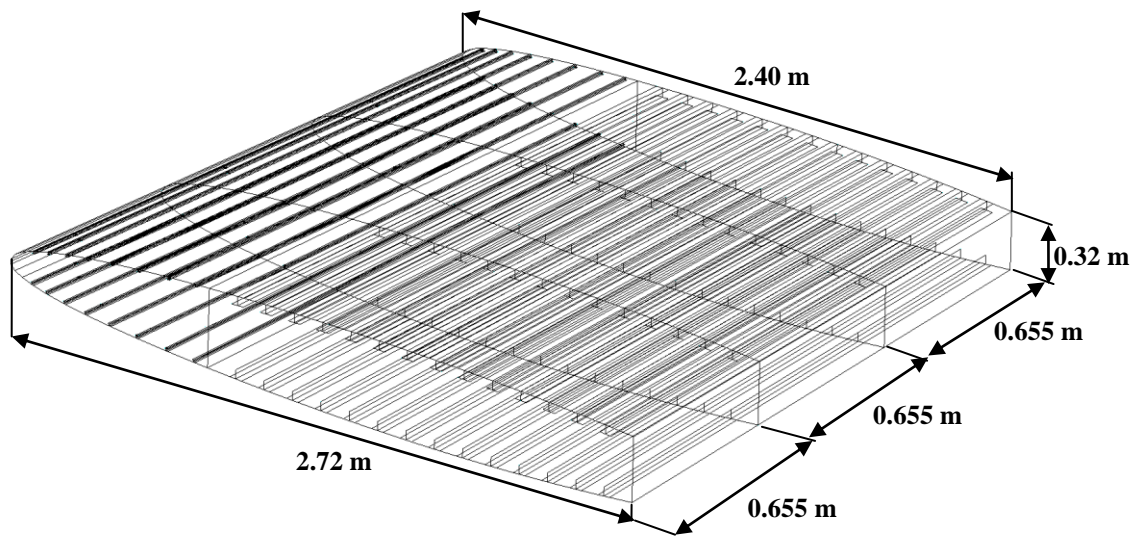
Geometrical details of the 2 m section wing box and leading edge
